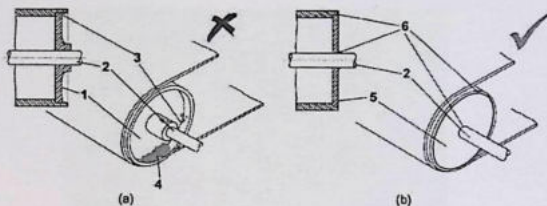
(a) Pressed-in roller ends (1) create dead areas and crevices (3), where residues of product and soil (4) may accumulate. (b) Flush roller ends (5) which are properly welded (6) to the roller and to the shaft (2) avoid any hazard and can be cleaned easily (CFPRA, 1983; Hauser et al., 2004b).
